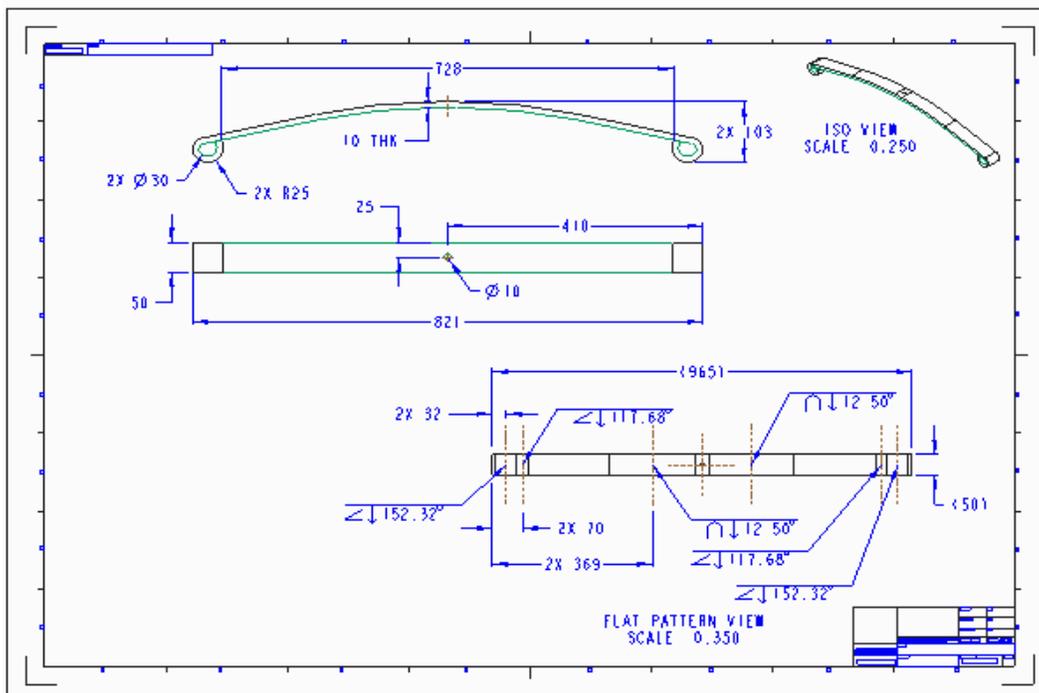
Drawing Specifications for the Mono Leaf Spring.
